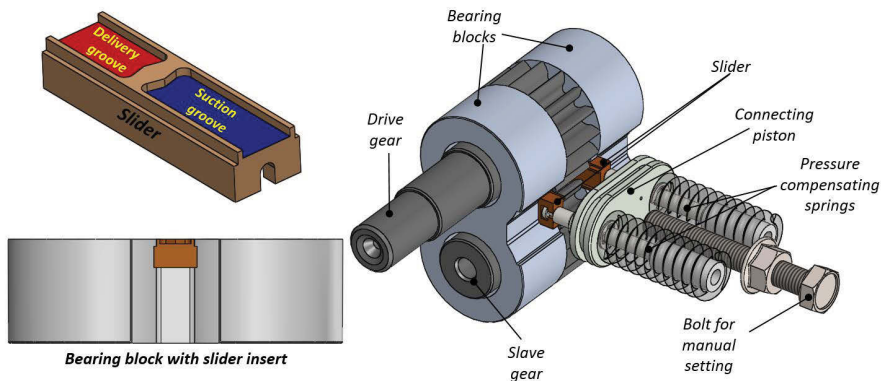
Slider and its placement on the bearing block (left), complete flow control system (right)
